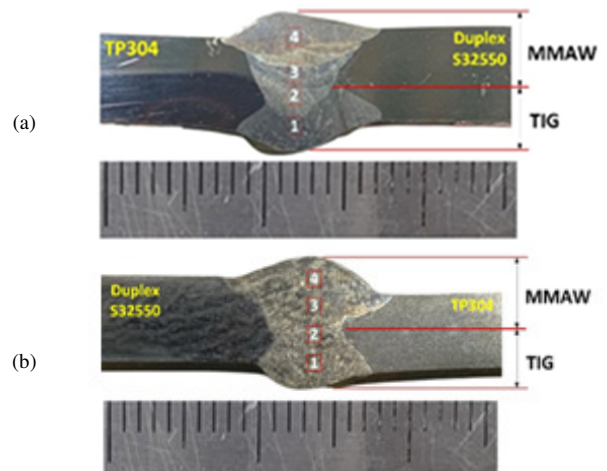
High-quality macrographs showing the weld bead profiles and full penetration of the joints using: (a) Filler 309, and (b) filler 2594. Numbers 1–4 indicate the specific welding sequences for root, hot, filler, and capping passes.
